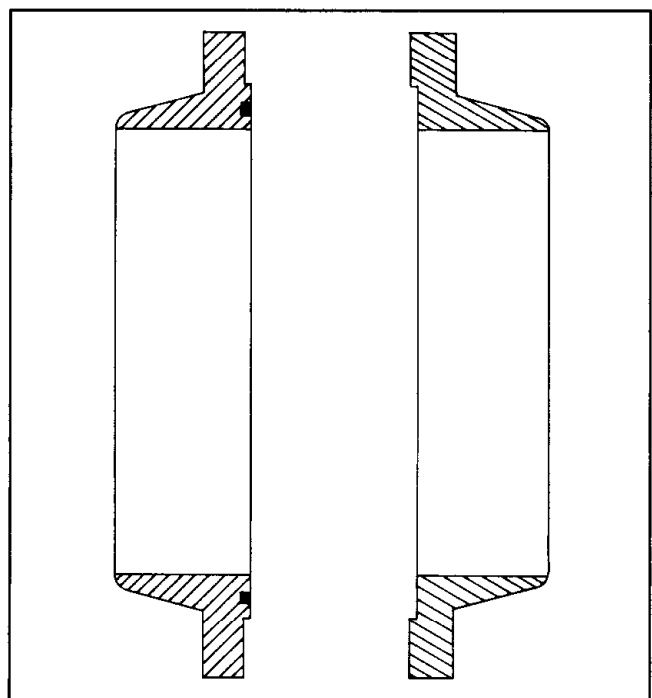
Match Bored - Tongue and Groove O-Ring Flanges
